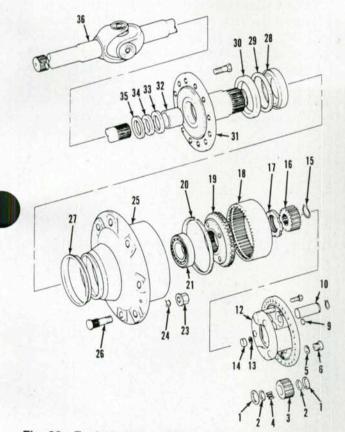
Exploded view of hub and planetary final drive used in APL-3054 type front drive axle used on early TW-35 models.
